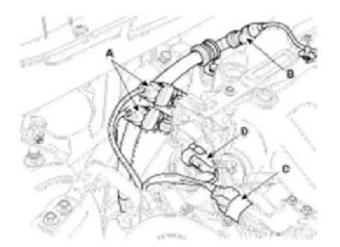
Identifying Rear Oxygen Sensor Connectors Courtesy of HYUNDAI MOTOR CO.
